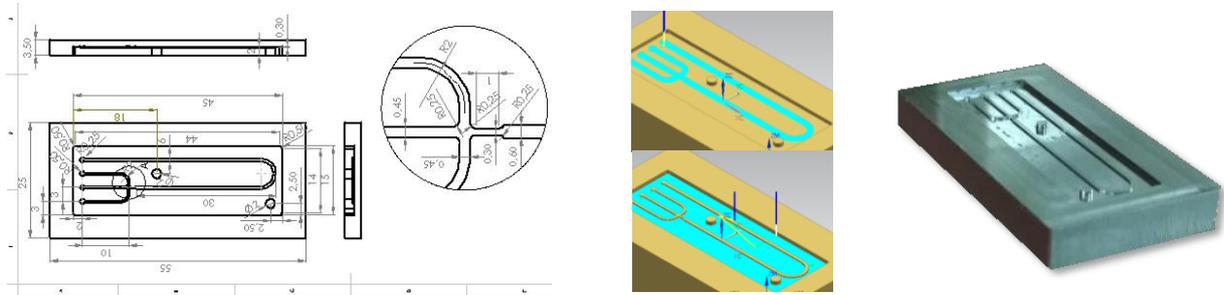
Manufacturing process realization: (a) technical drawing of a mould with micro features; (b) CAM tool path generation of finishing operations; (c) machined mould.
